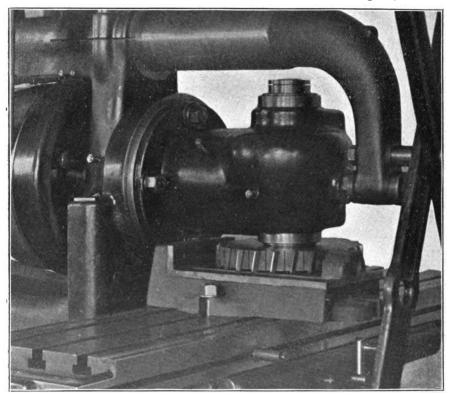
INSERTED TOOTH CUTTER FINISHING A VISE
